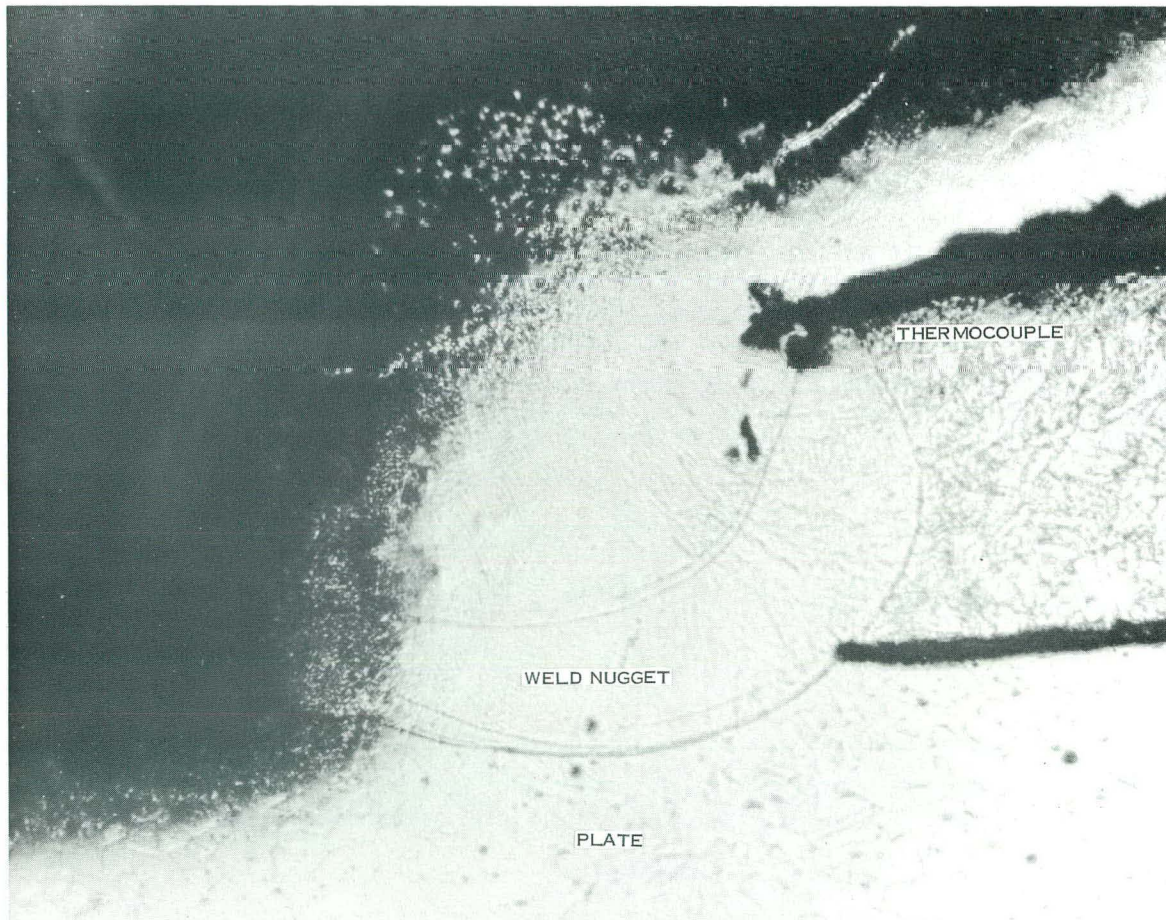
Weld penetration of 0.062-inch thermocouple resistance-welded to 0.030-inch plate.
